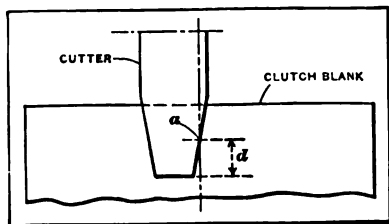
Diagram showing Position of Cutter for Milling Angular Clutch Teeth
